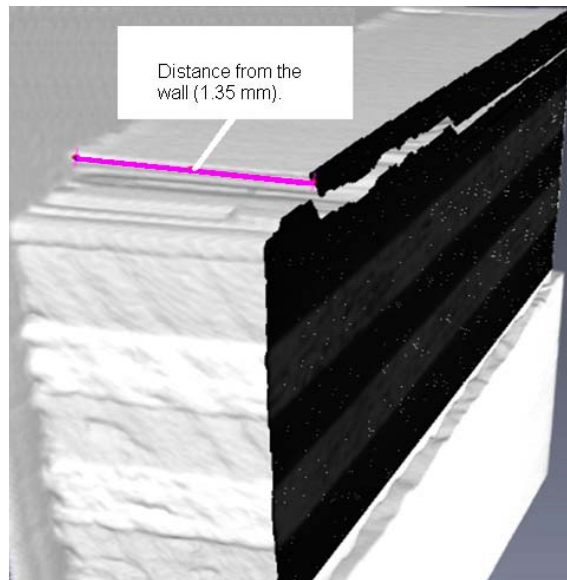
Cut view of the Design 1 specimen n. 1L.
